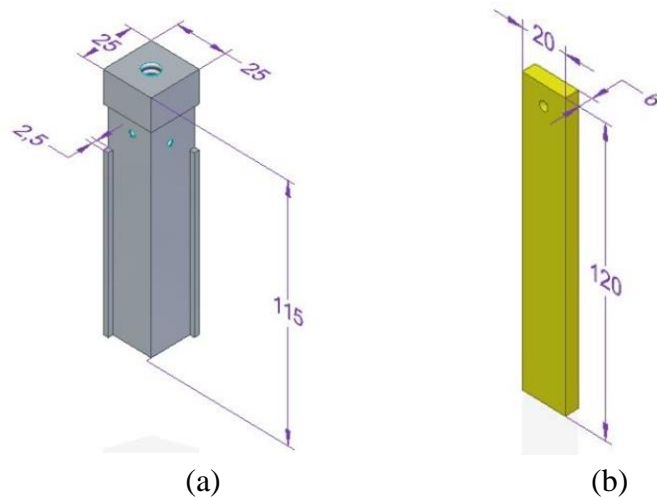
Holder and Sample dimensions of slurry-pot test system
